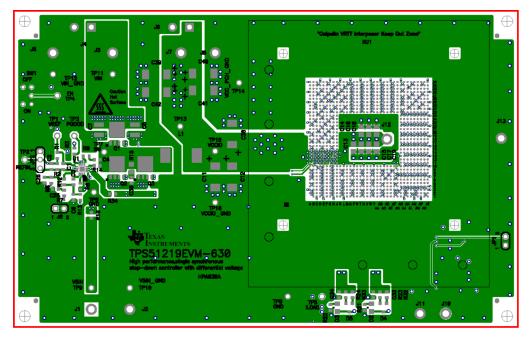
TPS51219EVM-630 Top Layer Assembly Drawing (Top View)
